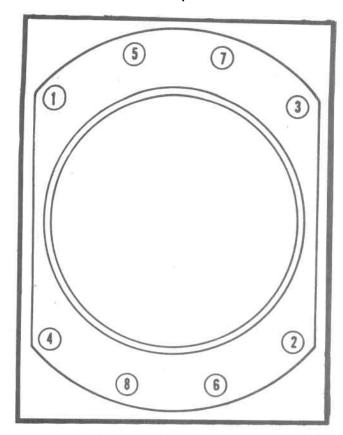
CYLINDER FLANGE TORQUE SEQUENCE FOR SINGLE CYLINDER INSTALLATION.
